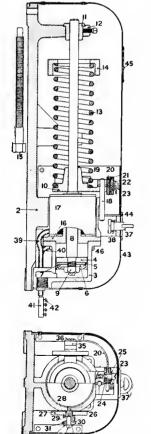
Electric Compressor Governor, Type G-1-A.
